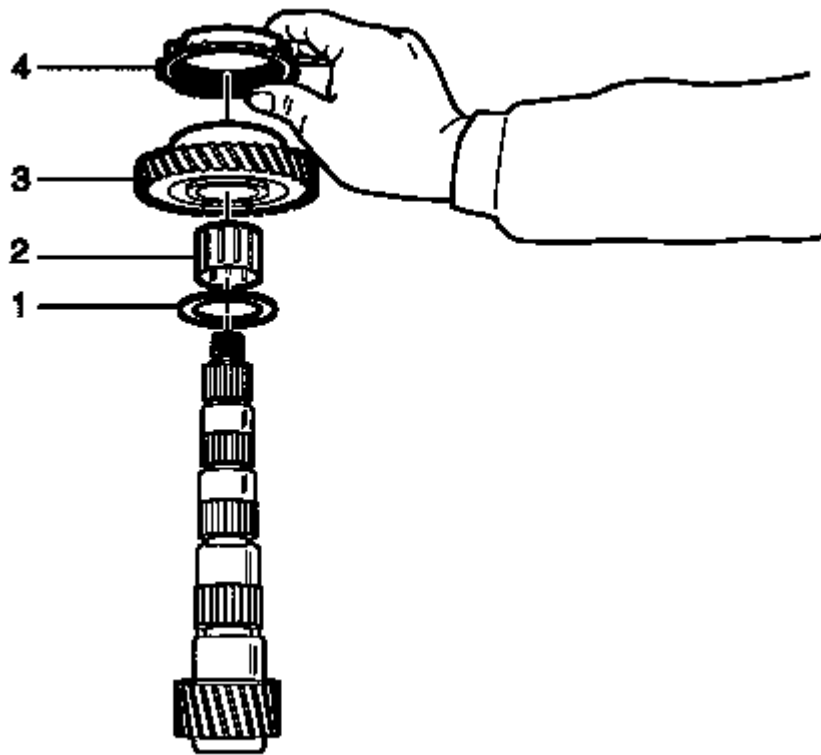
1st Gear Synchronizer Ring And 1st Gear Spacer
